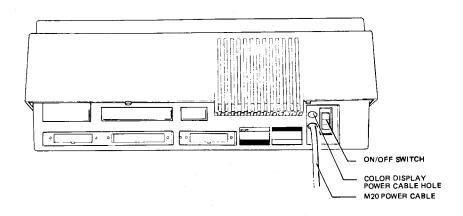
Removal of the Power Supply Cable & ON/OFF Switch
